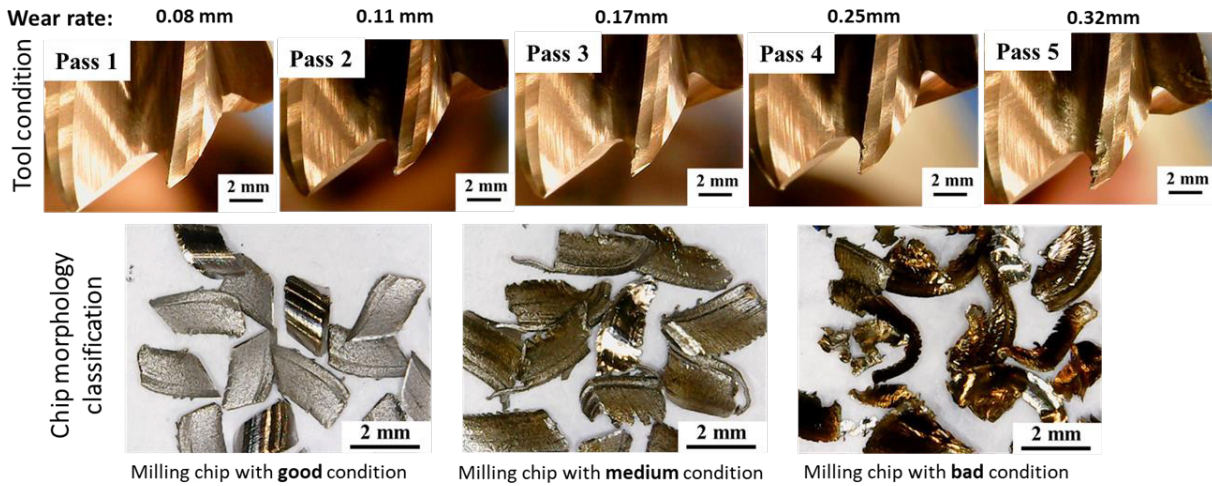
Tool wear measurement after each cutting pass and classified chip morphology based on tool wear progression
